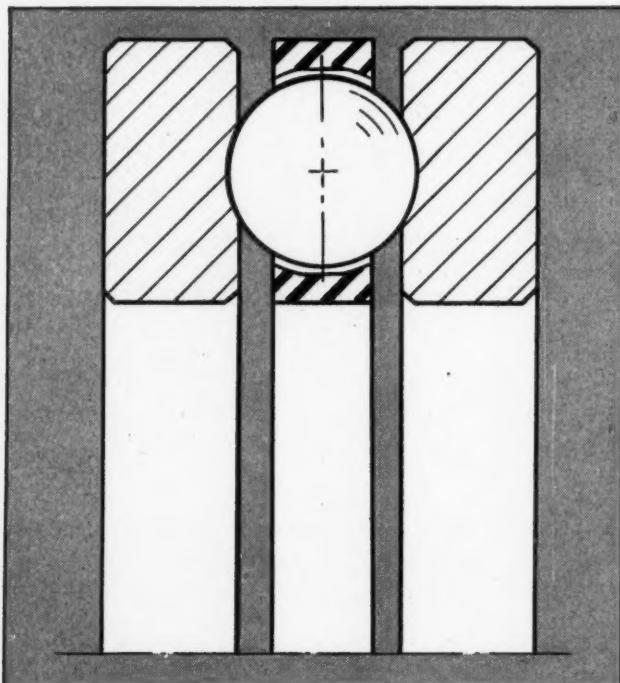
Below—Plain thrust bearing of the unidirectional type
